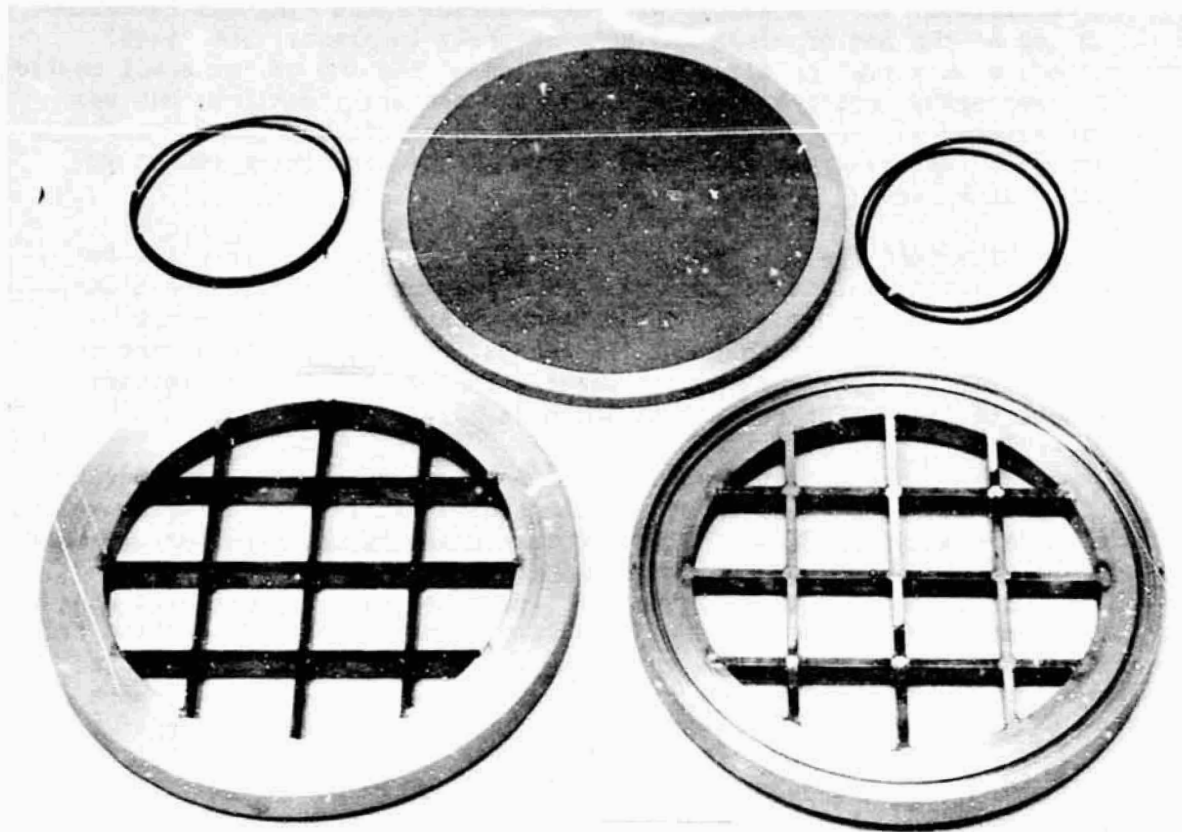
Whessoe Foamed Metal Arrester Test Assembly Exploded View
